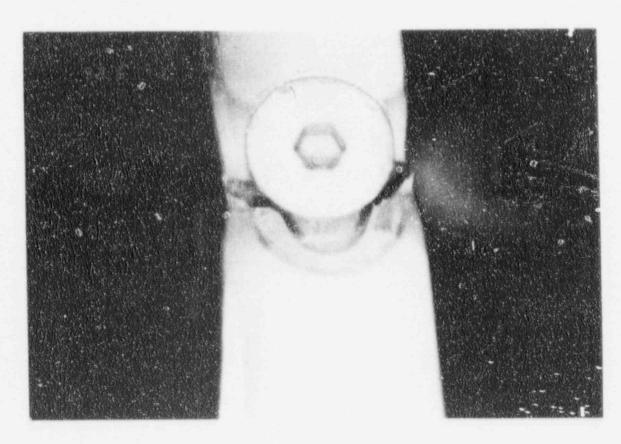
CRACK IN DISK SKIRT (PLAN VIEW)
